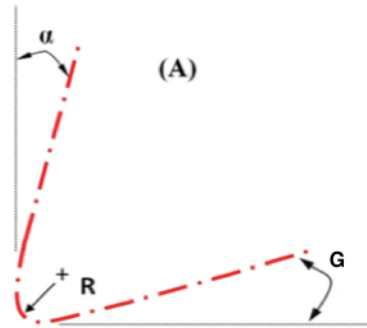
Geometry of rounded tool cutting edge (α , rake angle and G, end clearance angle, are maintain the same)
